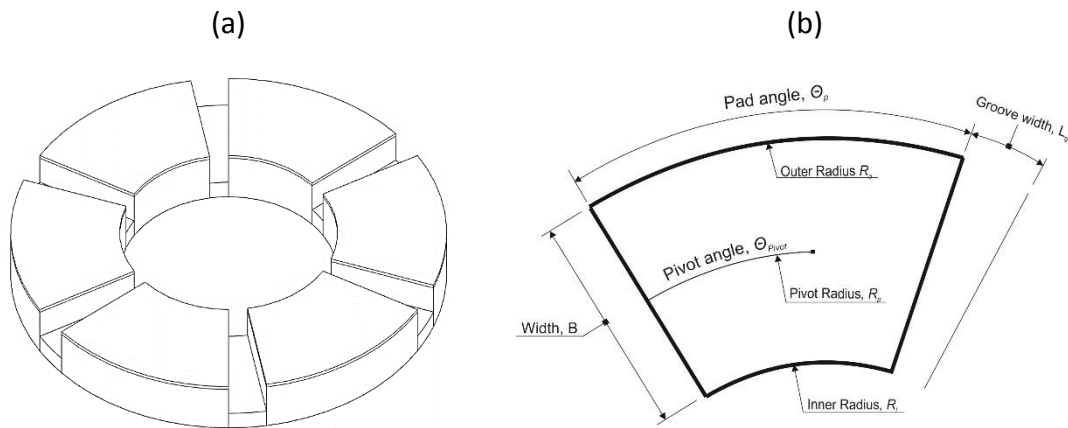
(a) Typical arrangement of a thrust bearing with six pads, (b) Principal dimensions of a bearing pad.
